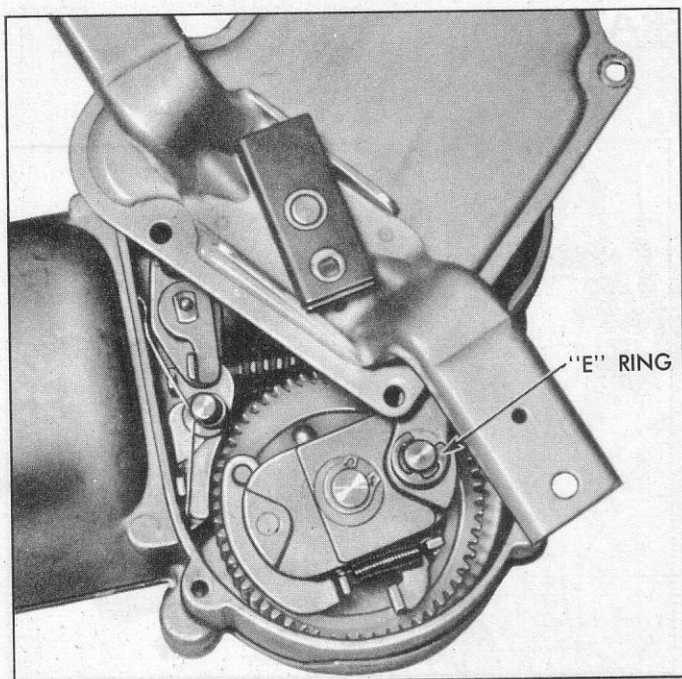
Gear Cover Rotated to Expose "E" Ring
